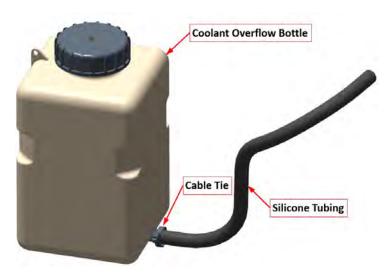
COOLANT OVERFLOW BOTTLE
